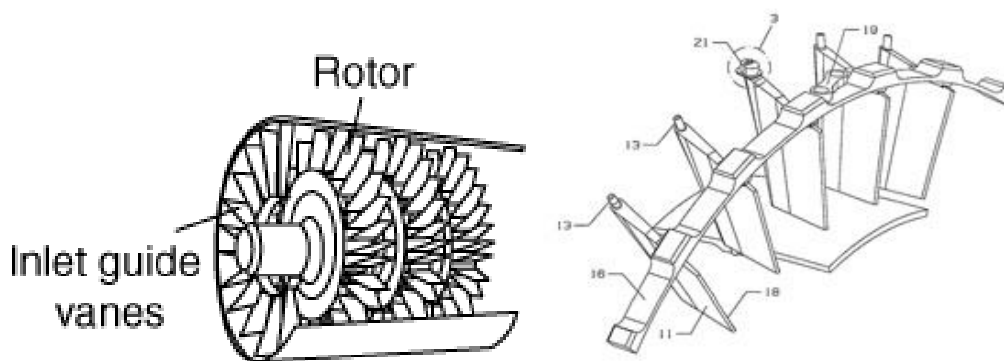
Configuration of inlet guide vanes in an axial machine
